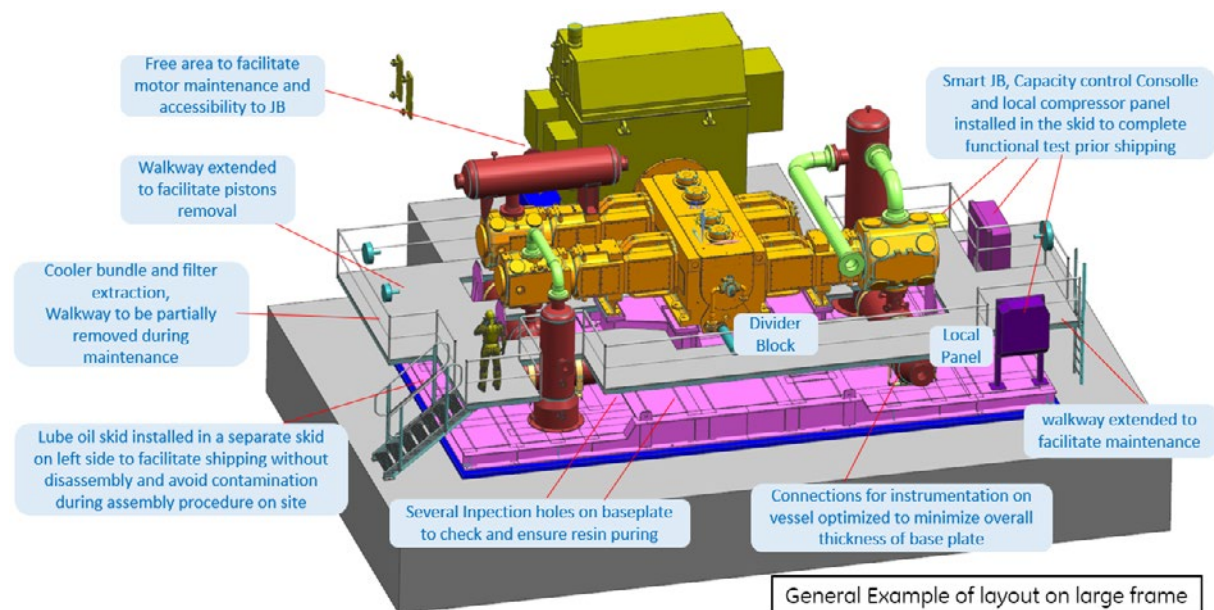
skid design with a big frame, dampers, gauge board and oil console. Off-skid motor
